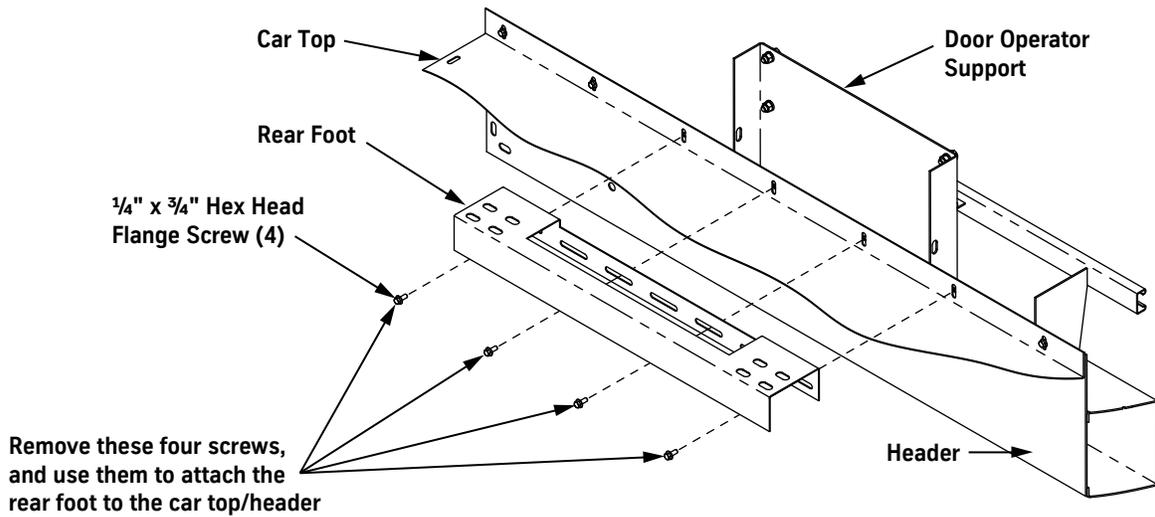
Door Operator Mounted on the Rear Foot Mounting
